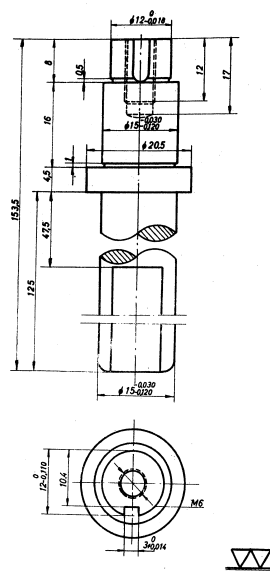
SPINDLE, ELEVATING MECHANISM
